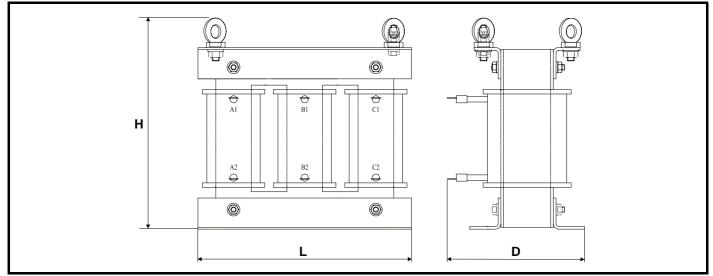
Switching frequency filter inductor type 3 dimensions
